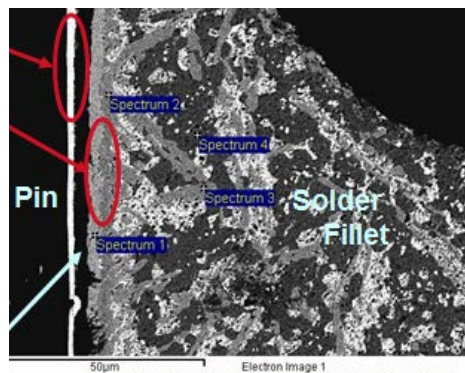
Microstructure of a Crack, Showing Residual Gold Layer (Top Oval), Crack (Lowest Arrow) and Duplex $\text{AuSn}_2/\text{AuSn}_4$ Compound Layer (Other Oval) in the Fillet (700X).
